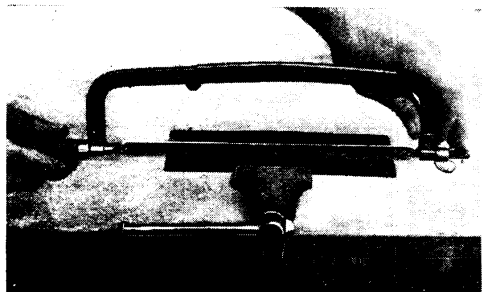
Laid flat on the bench is the ebonite plate, and the operator is cutting a long groove as a guide
